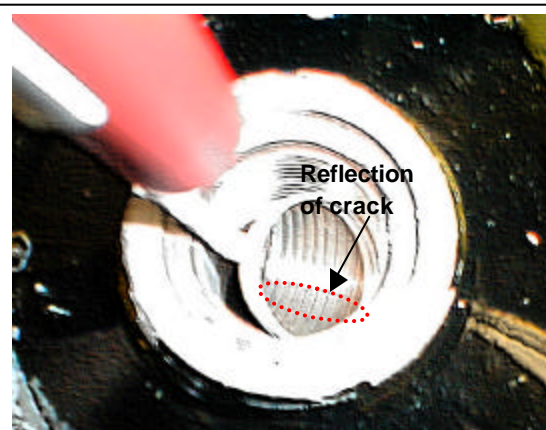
VT Equipment used to Visually Inspect the Compressed Gas Cylinders for this Project
